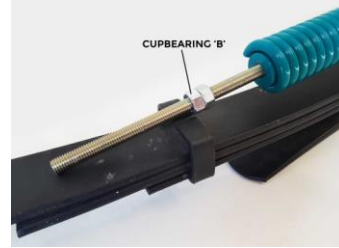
Sub- assembly Q (Draw Bar locked on Tie Bolt)
